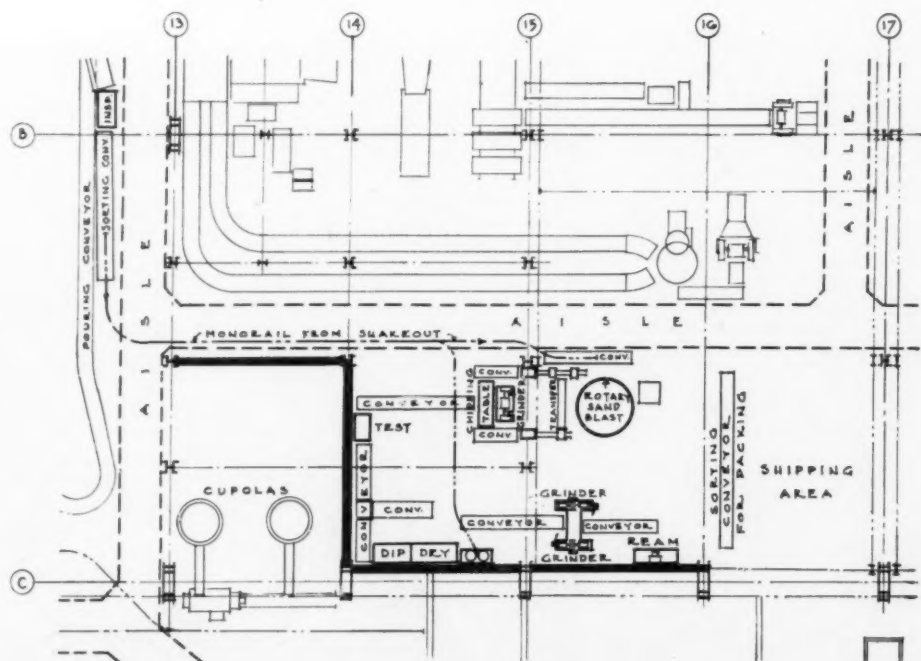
NEW LAYOUT OF GRID-GRINDING ROOM SHOWING HANDLING SYSTEM
